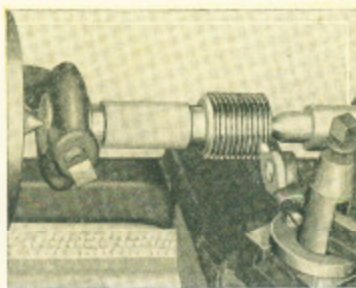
Threading a Master Thread Gauge on a New Model Lathe.
